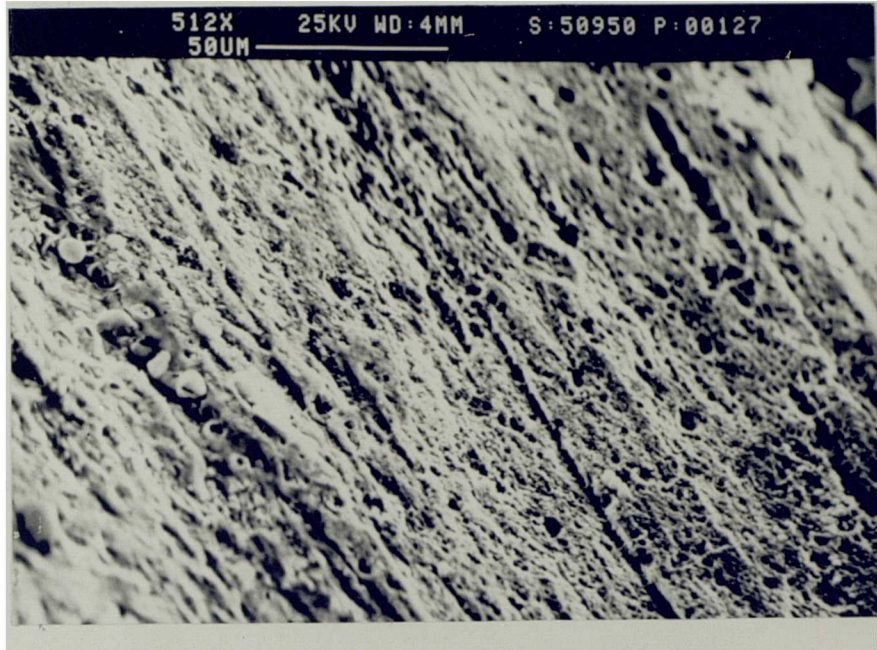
A worn flank face of KC910 carbide insert after machining for 30 secs at speed of 200 m/min.
